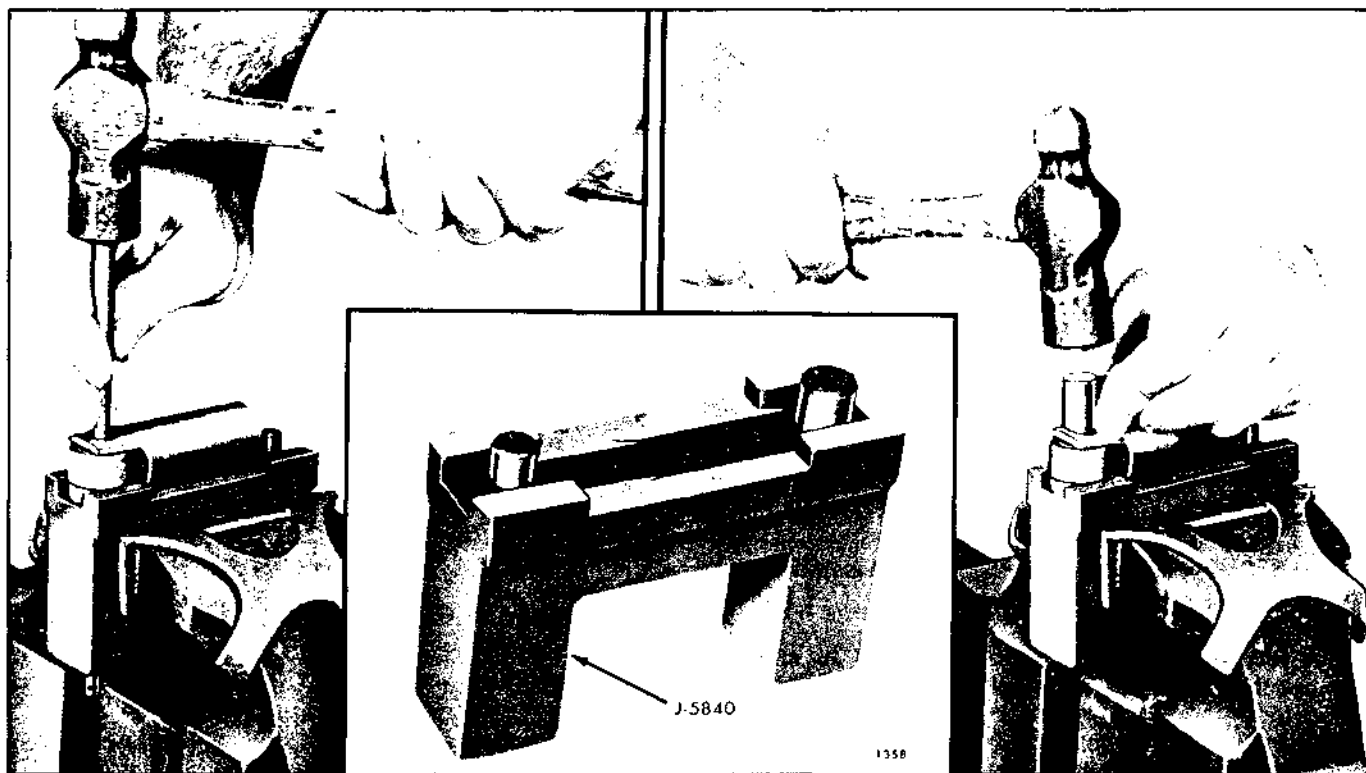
Removing or Installing Cam Follower Roller and Pin with Tool J 5840
